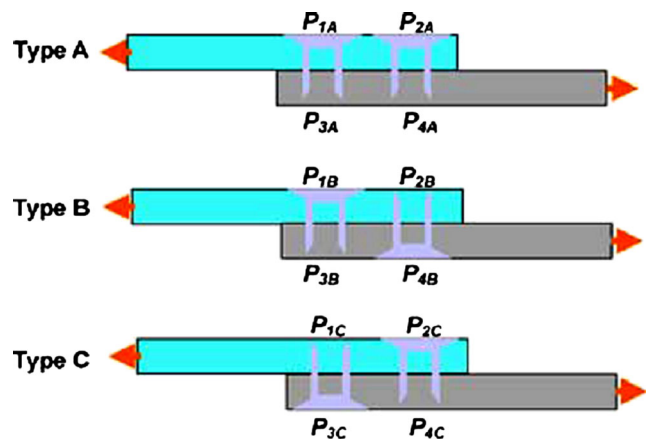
Three possible riveting orientation combinations with double-rivet joints when the upper and lower sheets are identical [130]
